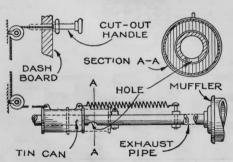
How to make an effective motor cut-out, using an old tin can and other discarded parts.
